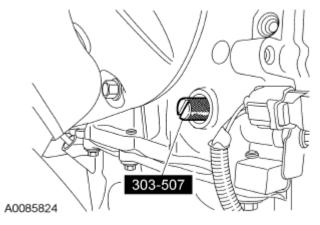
Identifying Crankshaft TDC Timing Peg (303-507) Courtesy of FORD MOTOR CO.
